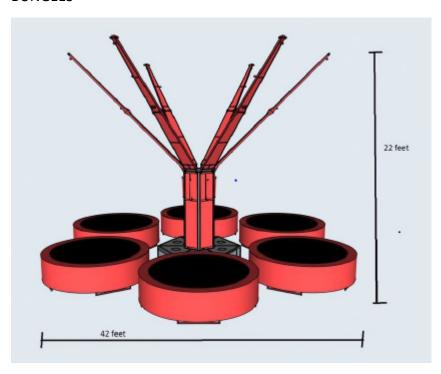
DETAILS & EXAMPLE OF RIDES/ATTRACTIONS
